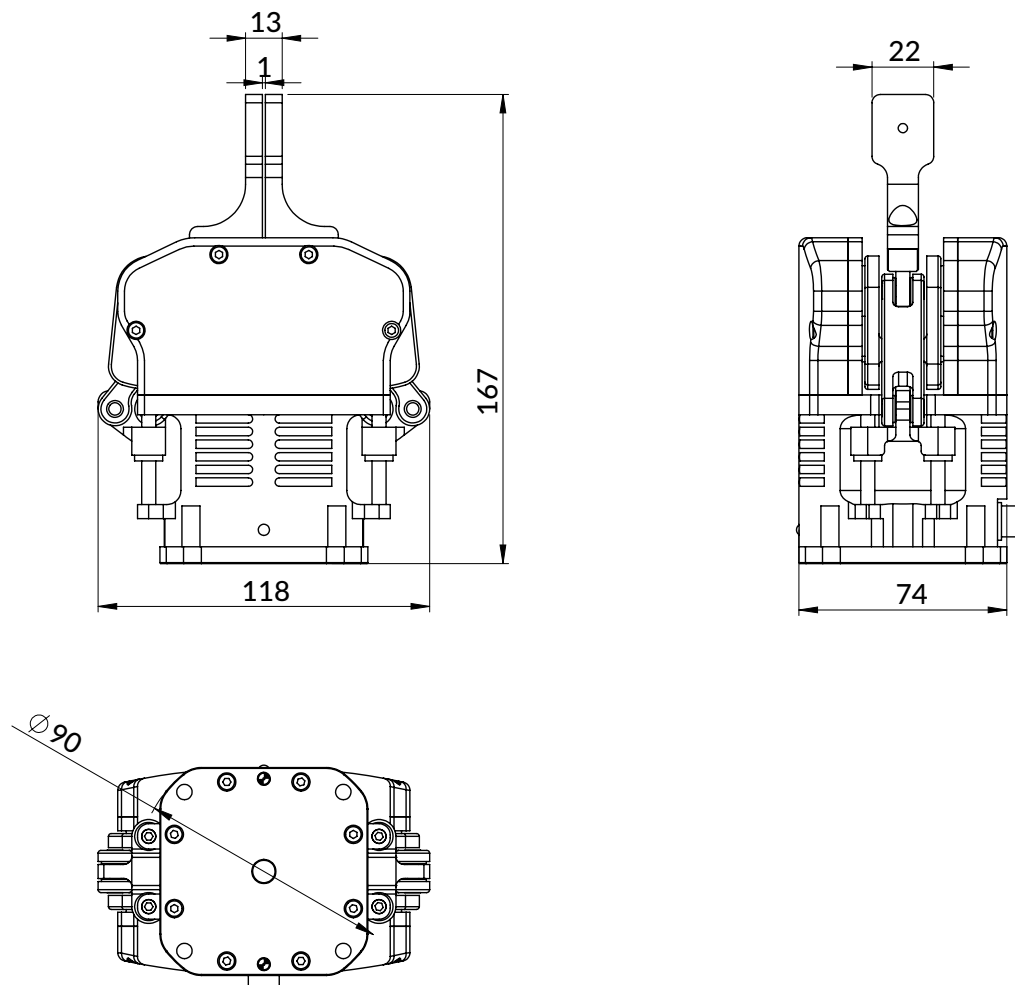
SusGrip 2F Mechanical Dimensions (Closing)
